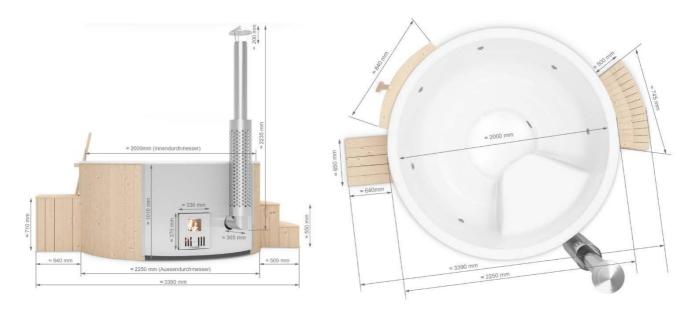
Dimensions for the Hot Tub 200, "WELLNESS" model
